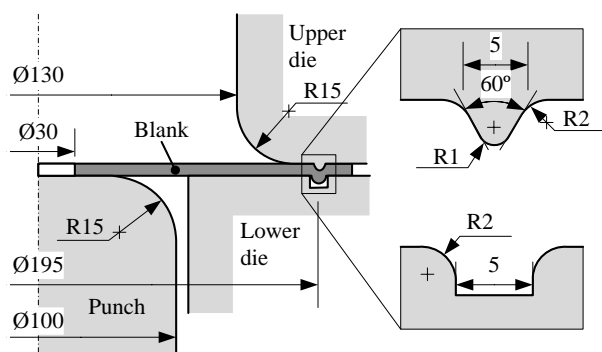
Schematic illustration of the tools geometry and specimen used in the hole expansion test. All dimensions are in millimeter.
